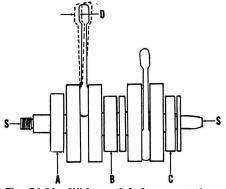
With crankshaft supported on lathe centers at (S), crankshaft eccentricity when measured at points (A, B & C) must be less than 0.0024 inch. Connecting rod shake (D) should be less than 0.118 inch.
